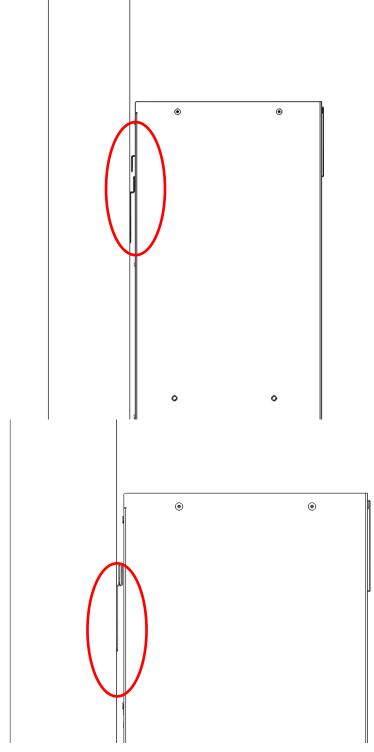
Hang the PK-220 Mounting Bracket on the Mounting Cleat
